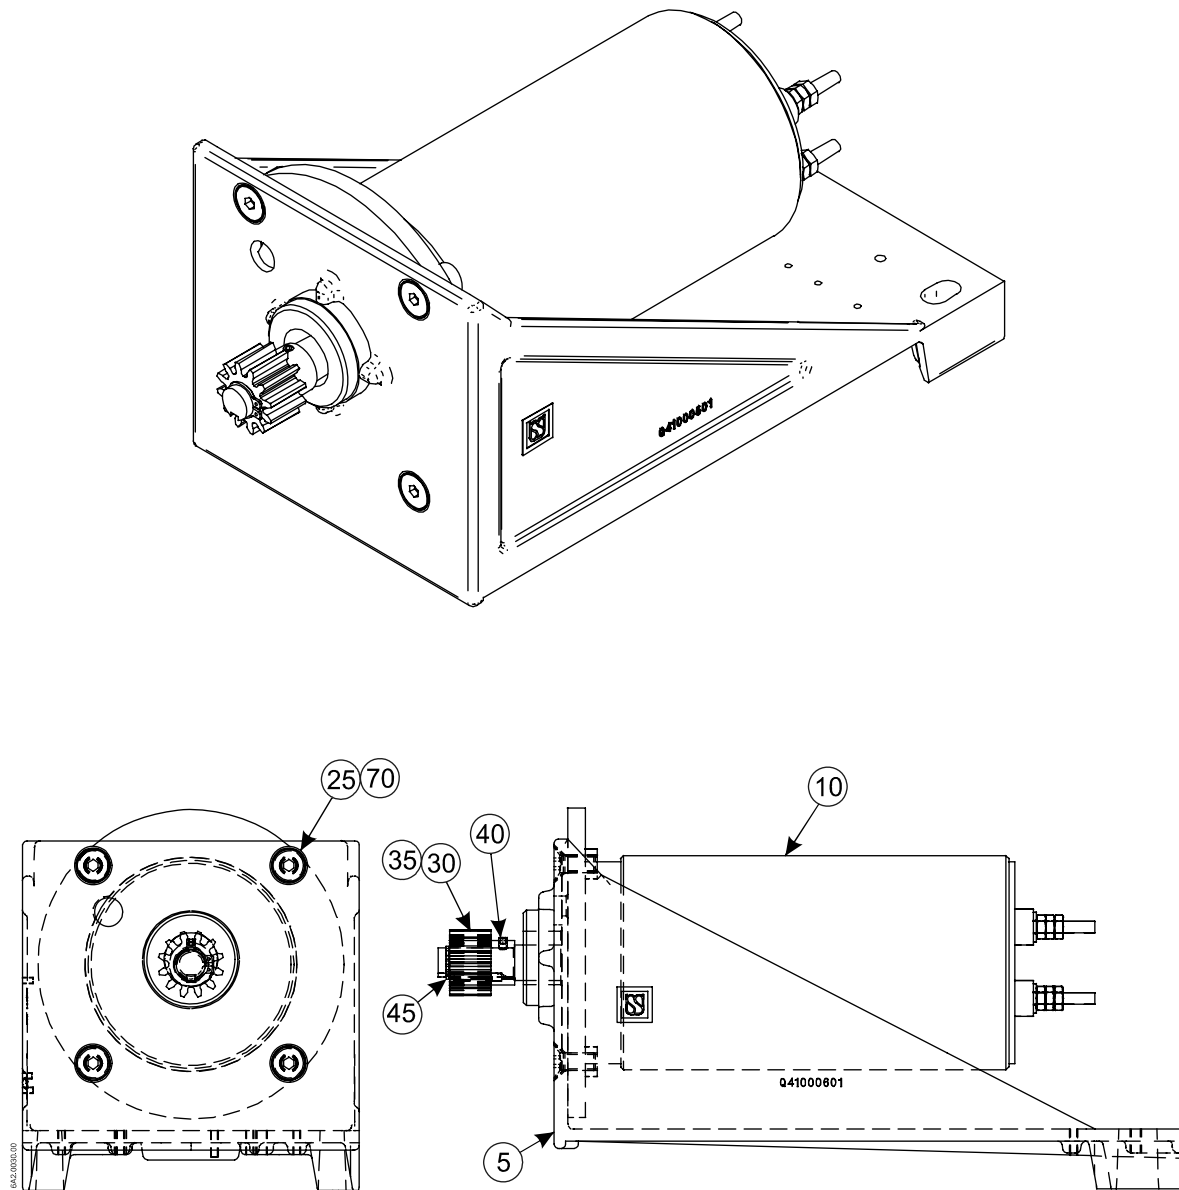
Motor (Blue) Assembly (N451161-17xx) Parts Location
